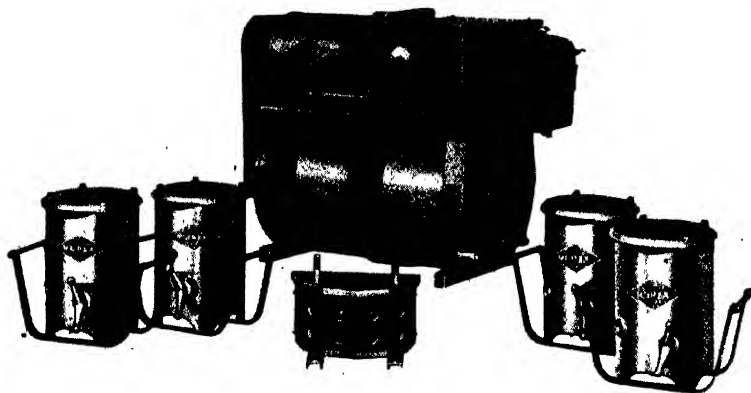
MULTI-OPERATOR ARC-WELDING EQUIPMENT
